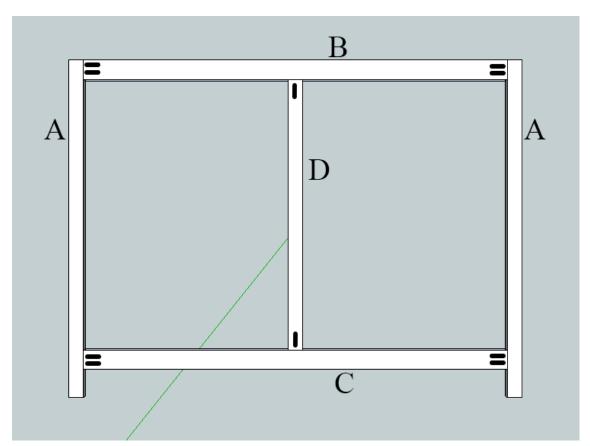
Bottom Cabinet Face Frame Arrangement and Pocket Hole Locations
